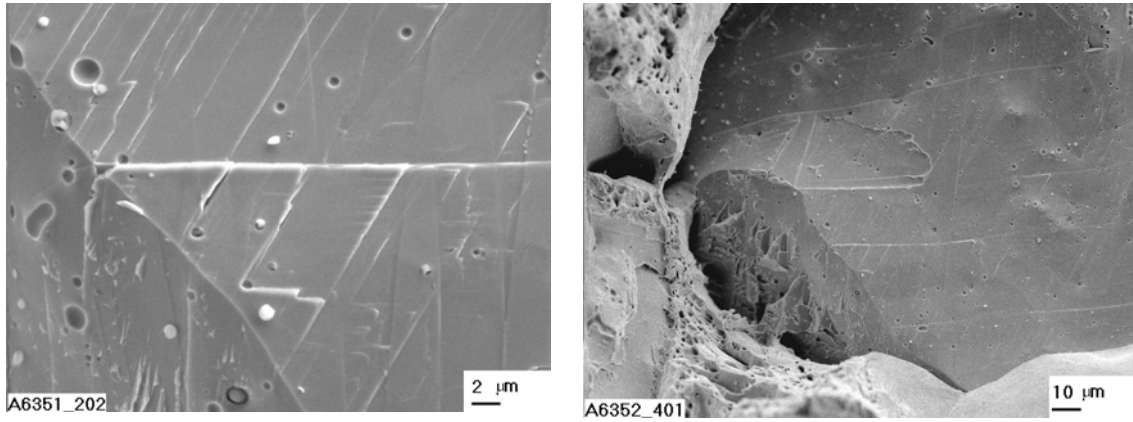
Detail images of intergranular fracture component, left, and transgranular fracture component, right, showing ductile fracture dimples.
